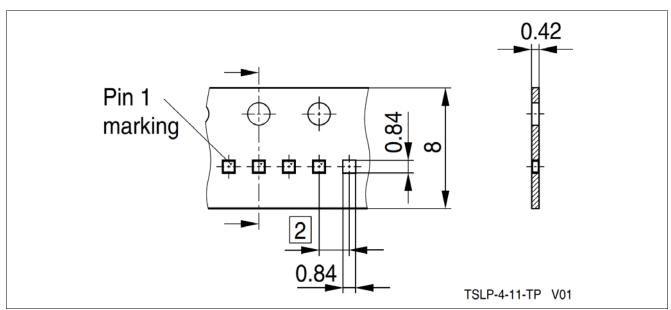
Tape & Reel Dimensions (reel diameter 180 mm, pieces/reel 15000)
